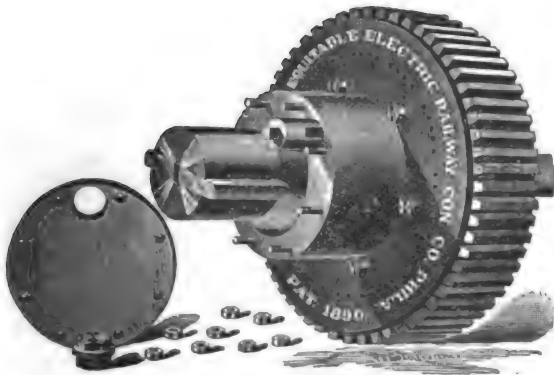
WENSTROM HYDRAULIC GEAR, SHOWING ECCENTRIC BOX AND KEYS.
